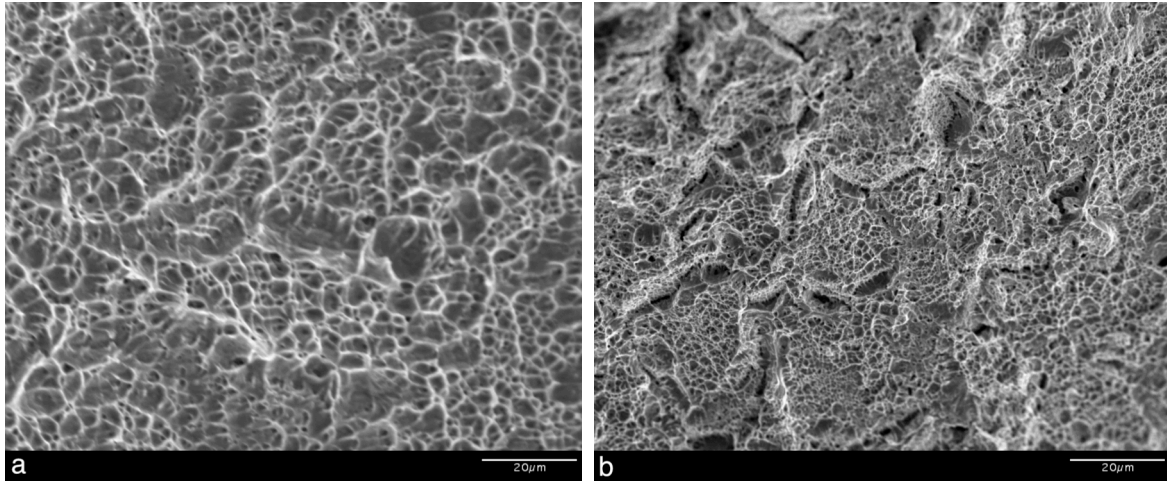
Fracture surfaces of type 304L tubing, material 2/condition A sensitized and tested at room temperature: (a) non-charged, and (b) hydrogen precharged.
